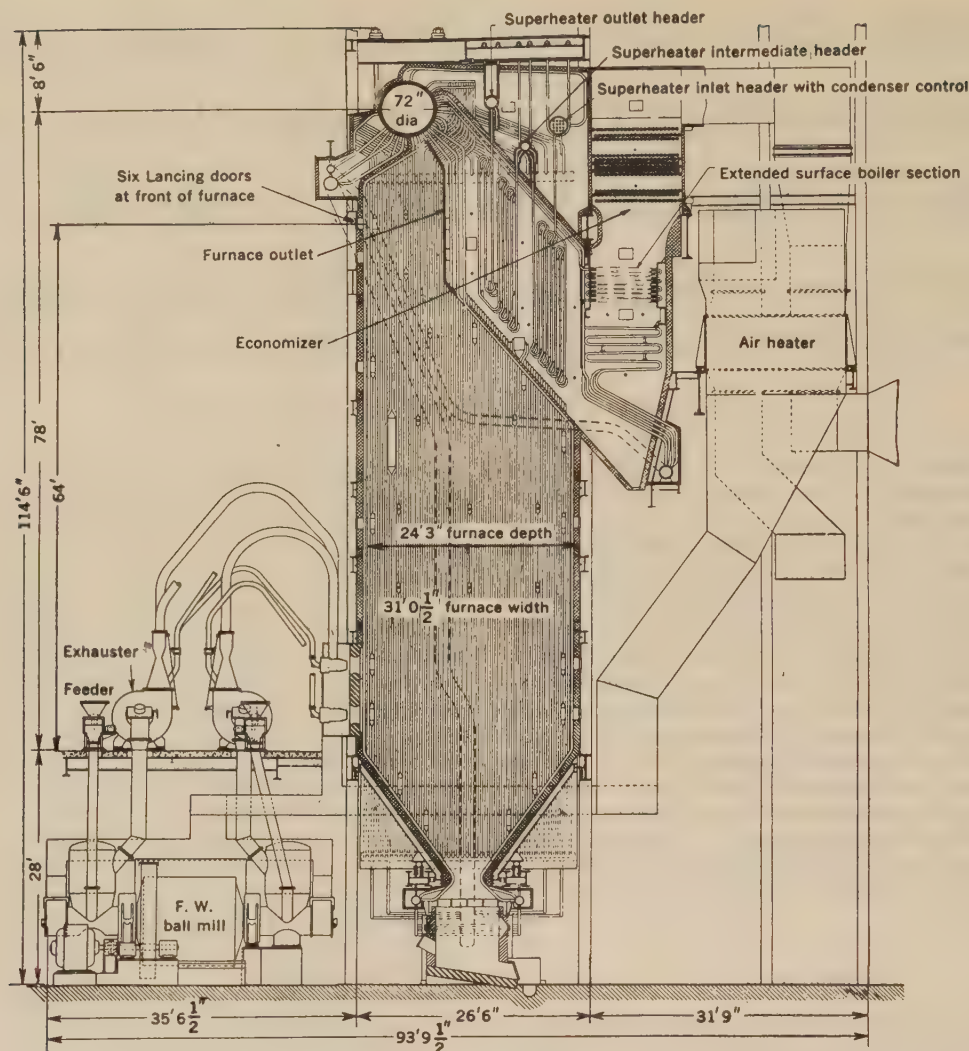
SECTIONAL SIDE ELEVATION OF BOILER NO. 3, PADDY'S RUN STATION
